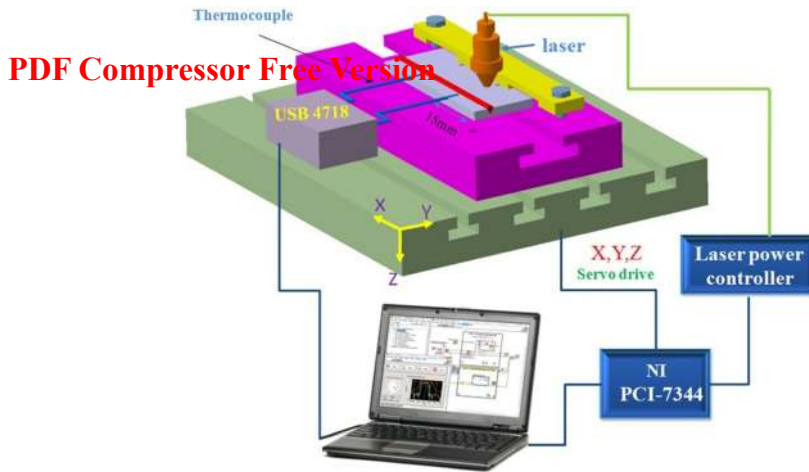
The schematic diagram of laser welding and monitoring system.
